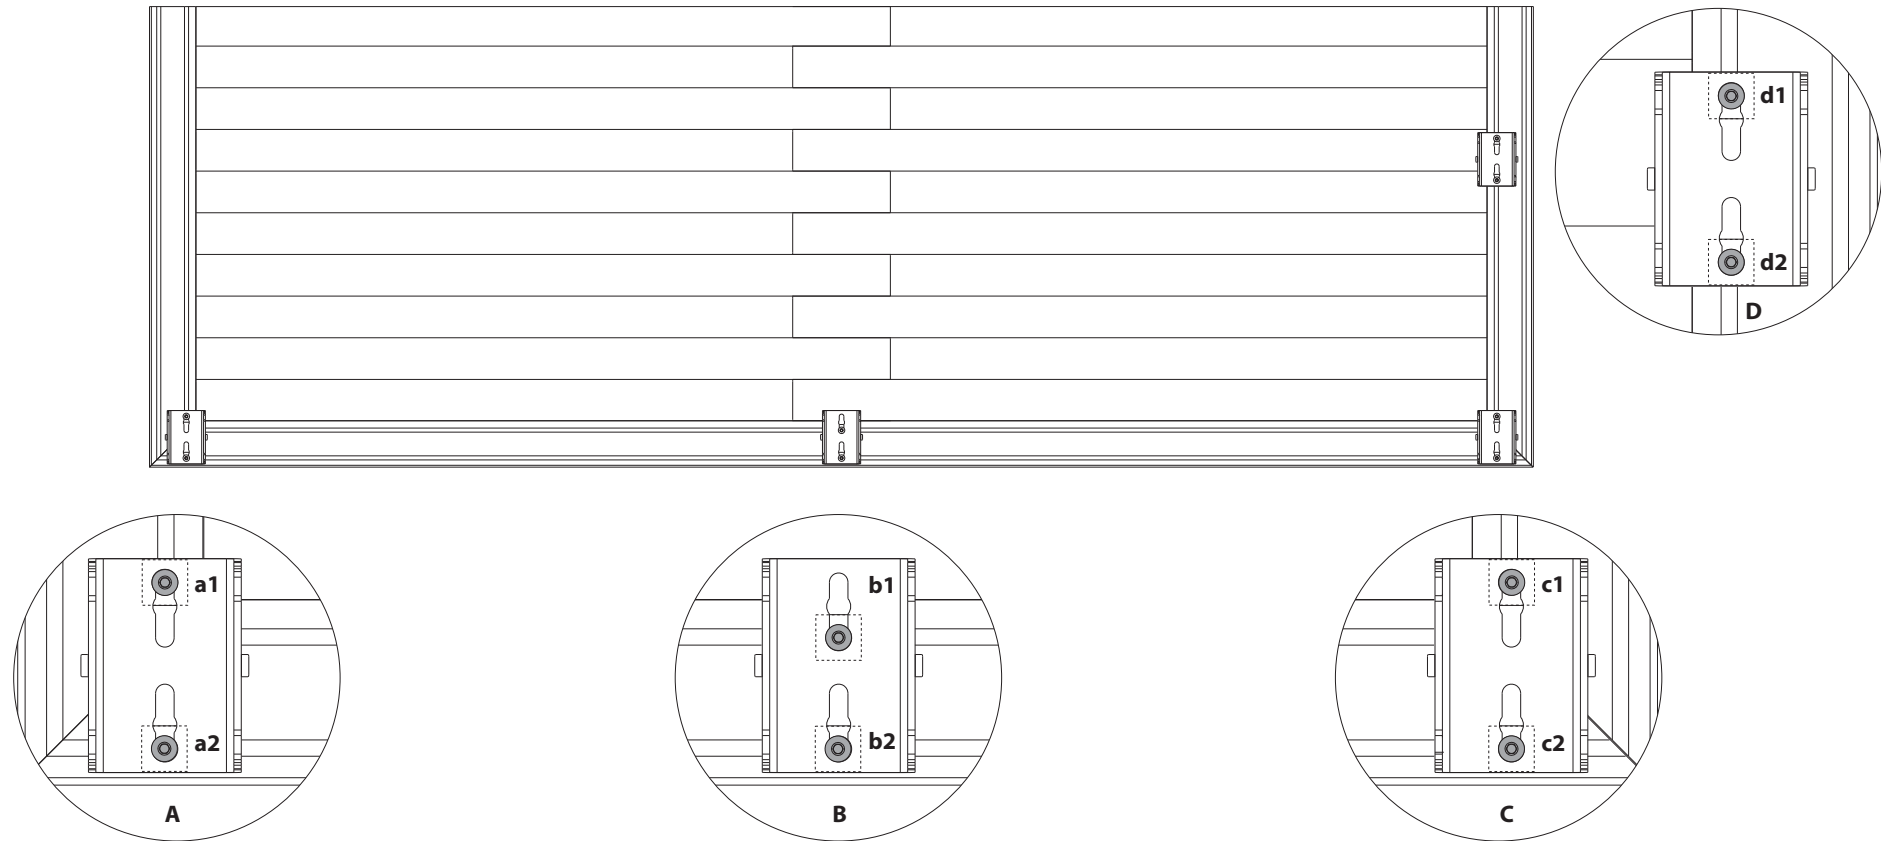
LAYOUT OF MILLENIUUM BRACKETS (use button head screws cod. 02167)
